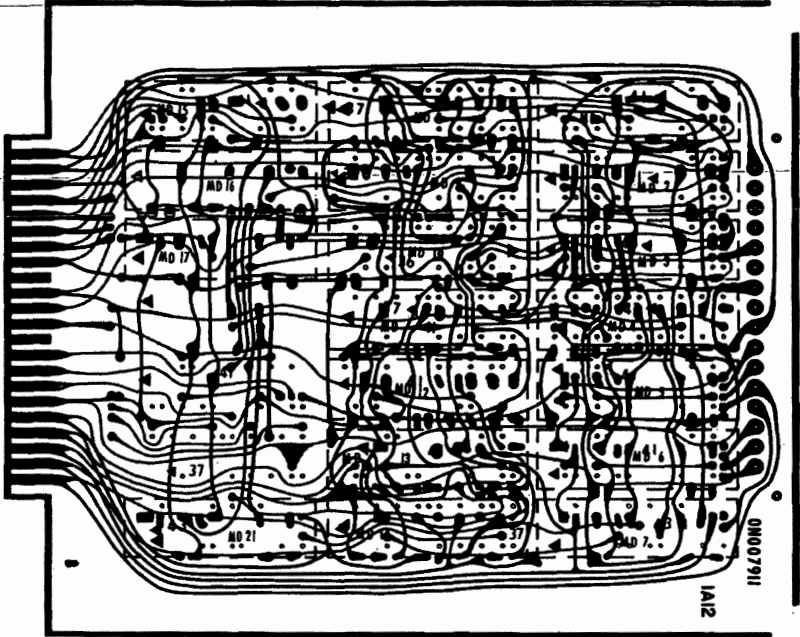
Card E-AJT Printed-Circuit Layout.
